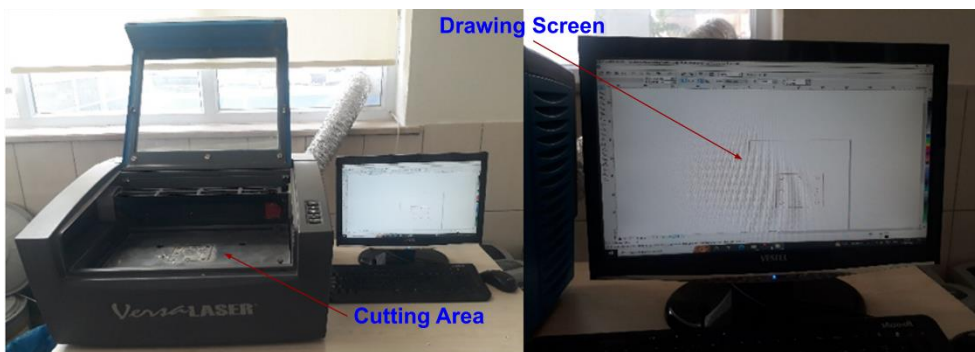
Laser cutting operation; cutting area (left), drawing screen (right)
